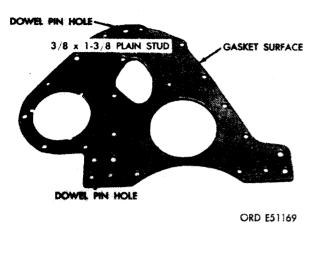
ENGINE FRONT PLATE AS REMOVED FROM ENGINE .
